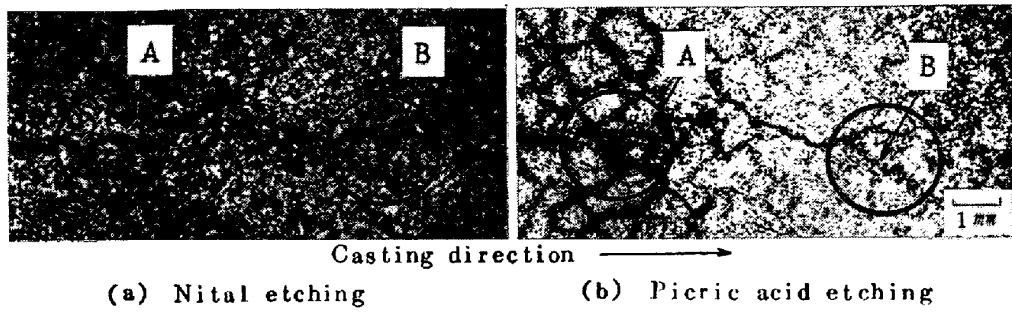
Enlarged picture of crack end of "A" and "B" parts shown in Photo 4. (4.0 mm below surface)
